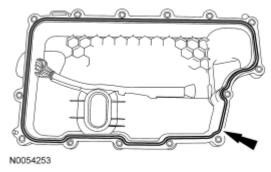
Inspecting Transaxle Main Control Cover Seal For Damage Courtesy of FORD MOTOR CO.
